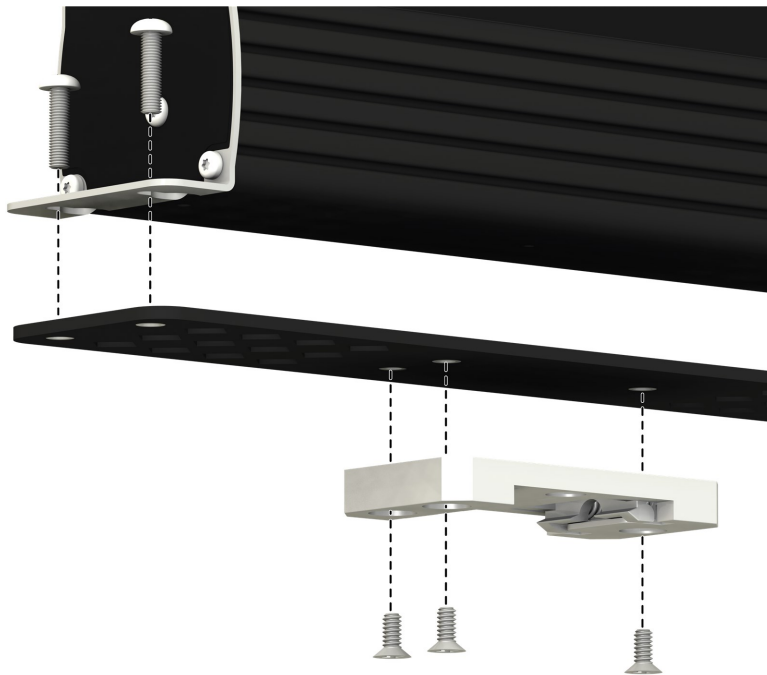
GRANITE DIN-Rail Mounting Kit
